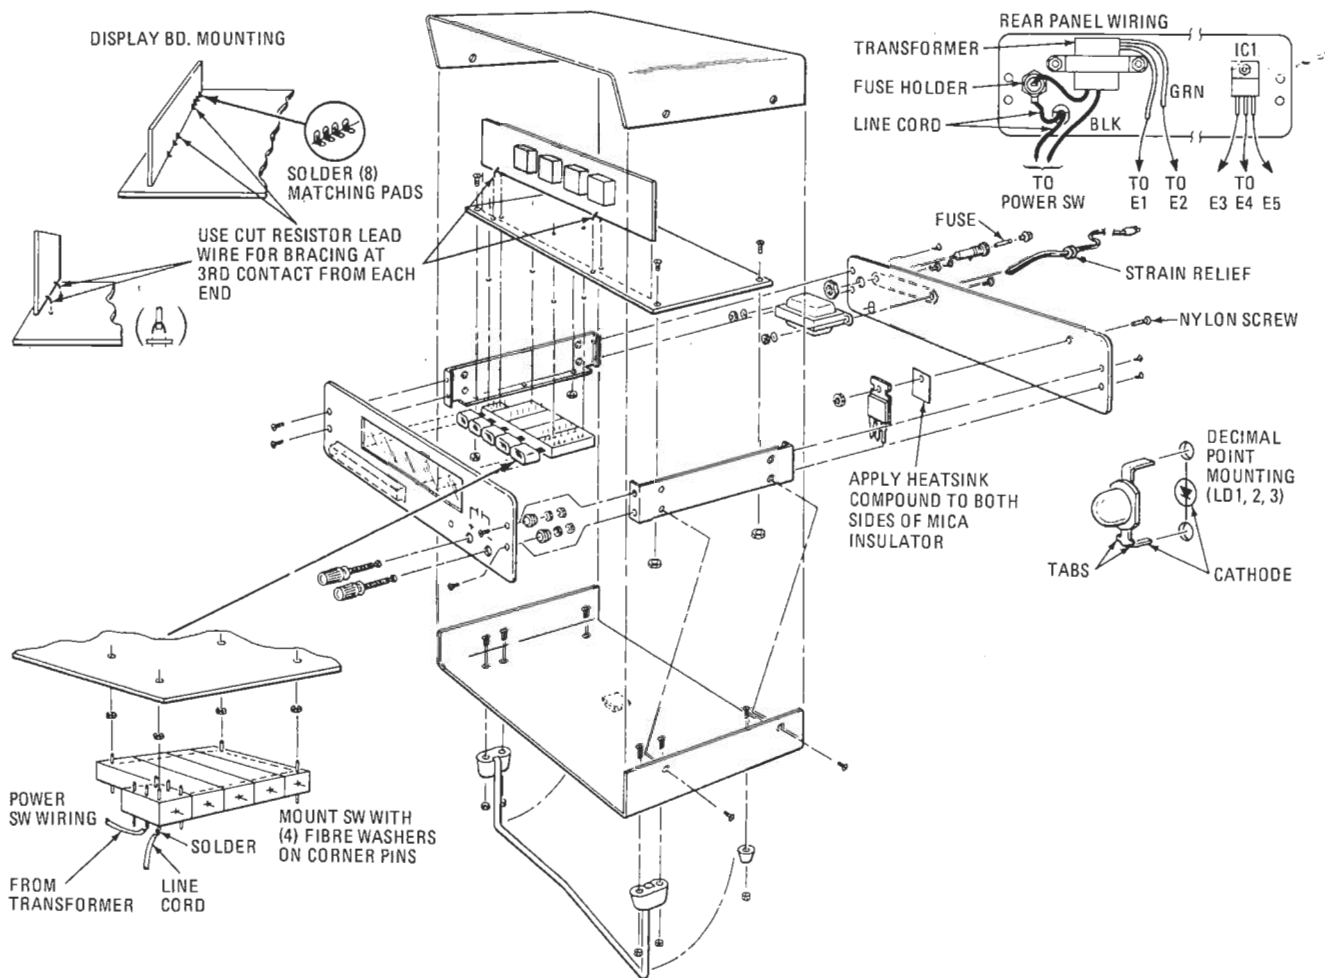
EXPLODED VIEW of the model CM-1000 digital capacitance meter. Parts are as supplied in the kit. Use this as a guide if you build your meter from scratch.
